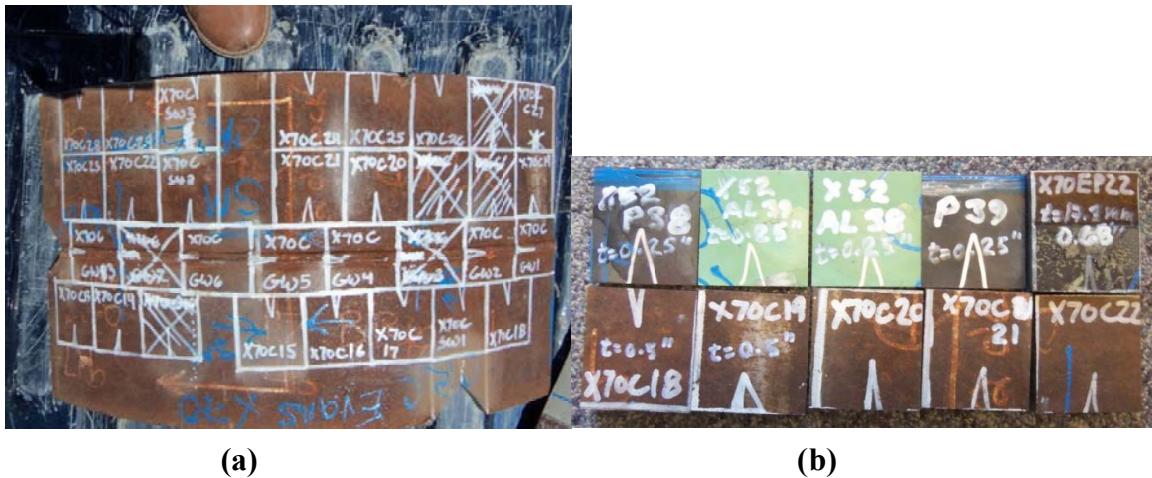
Images showing (a) a section of a pipe prepared for sectioning into specimen blanks, and (b) specimen blanks ready to be sent for machining.
